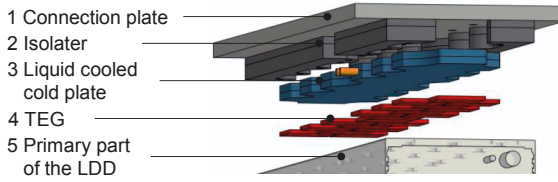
Concept of integration thermoelectric generators in a feed unit of a machine tool [IWF]
